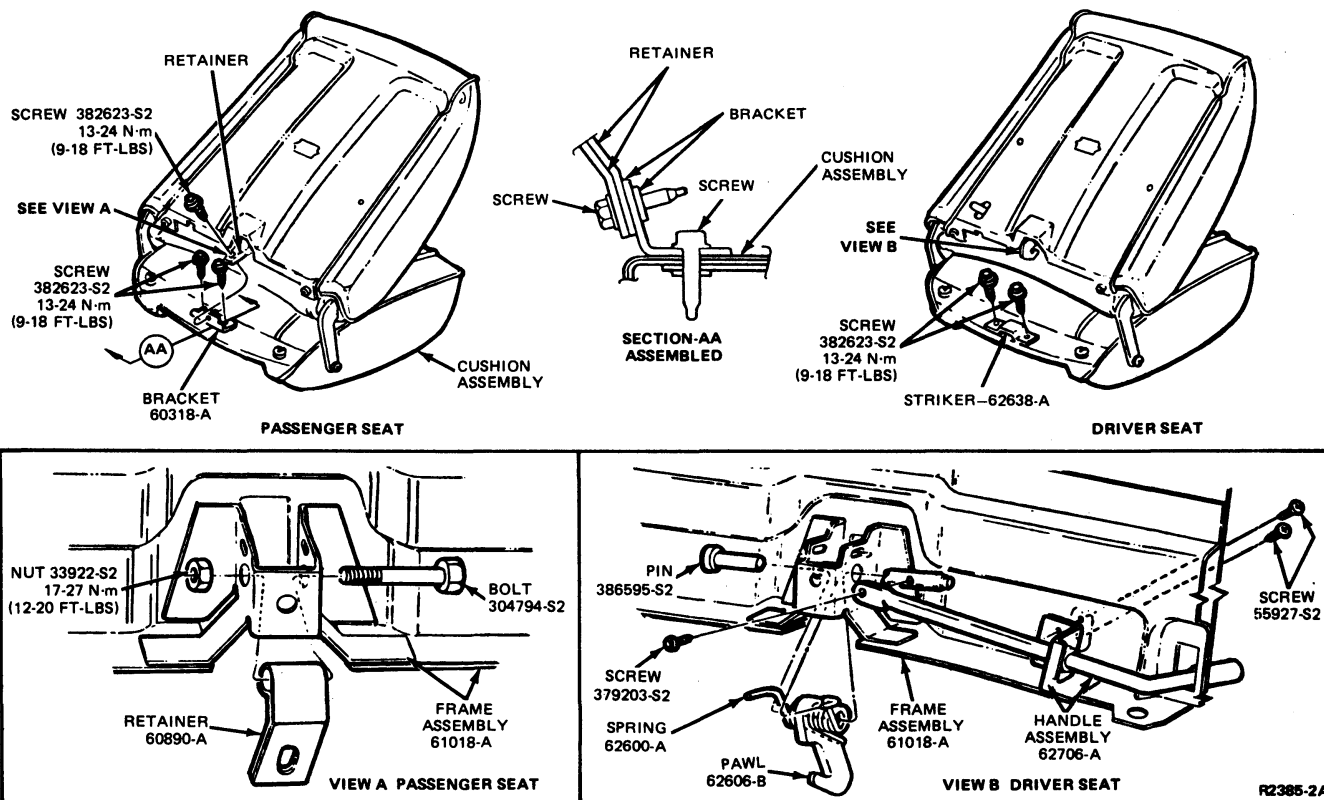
Bucket Seat Back Latch Installation—Bronco
